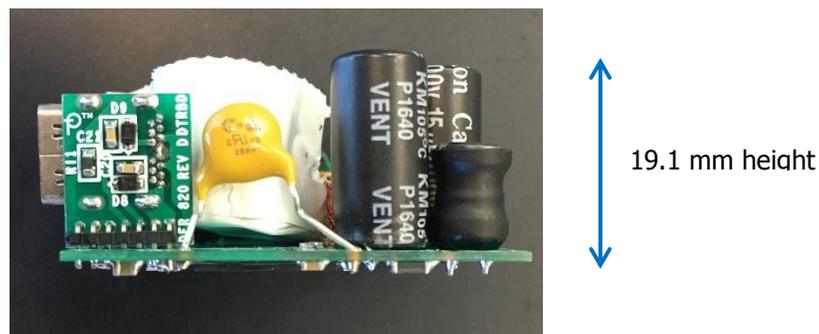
Populated Circuit Board Photograph, Entire Assembly.
